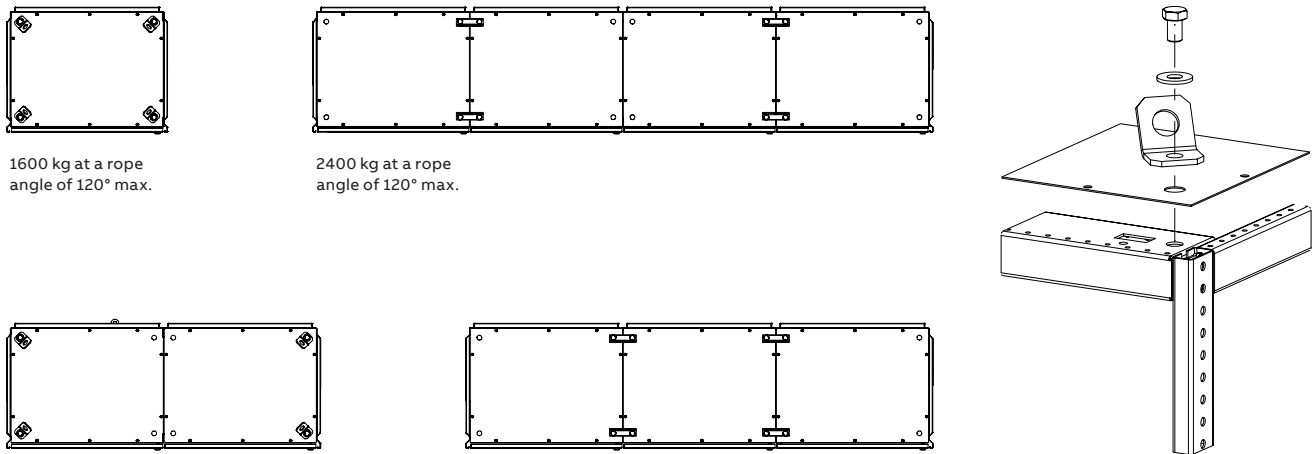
Arrangement of lifting angles (plan view of MNS section), detail values see Table 3-04
